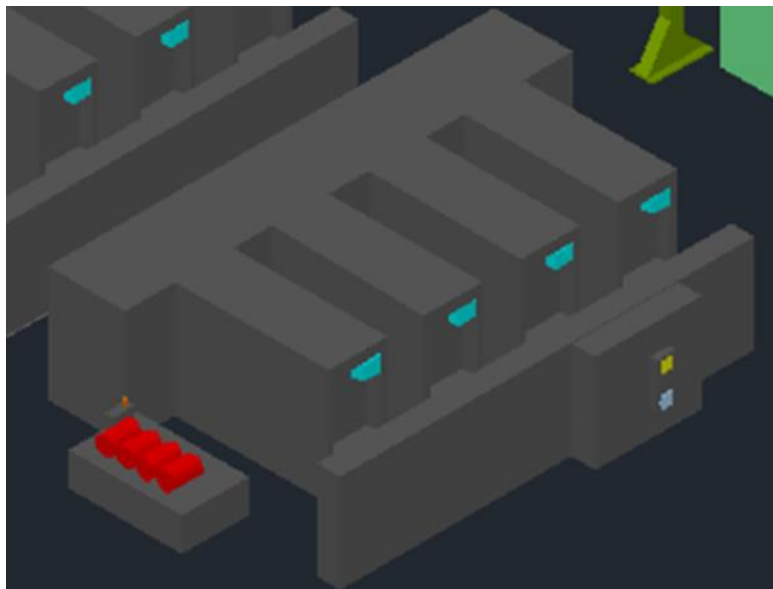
Figure X: Shows another machine within the initial CAD model. In this case a transfer machine is shown.
